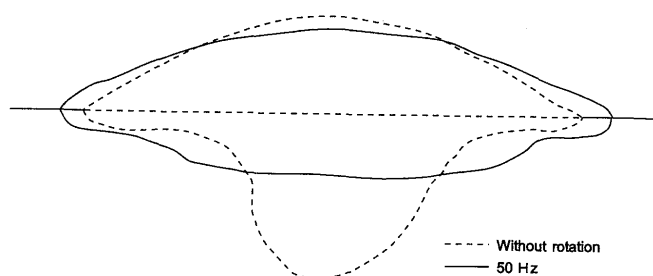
Bead and penetration shape improved by high speed rotating arc.
